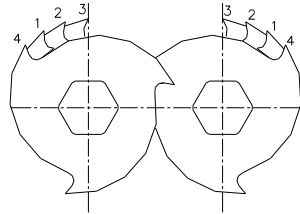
TYPICAL CUTTER LAYOUT - SINGLE SPIRAL SHOWN
